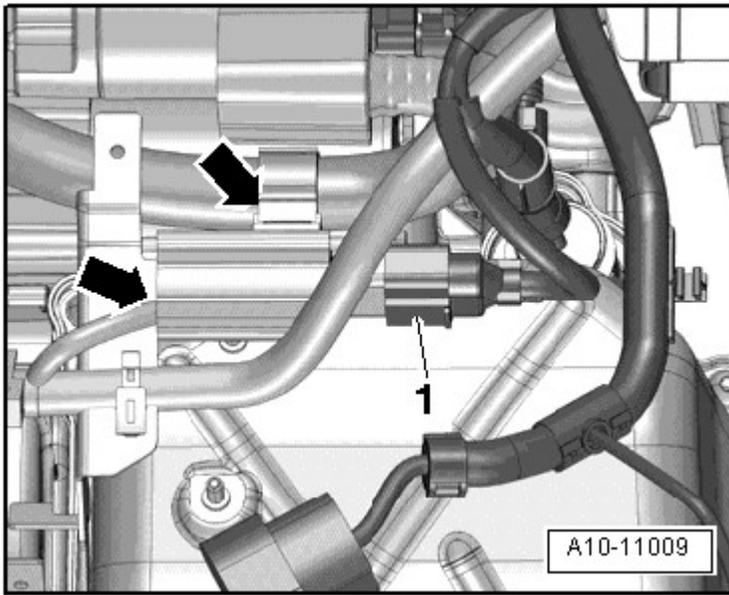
Identifying Wiring Harnesses And Connector On Hot Side Charge Air Pipe
